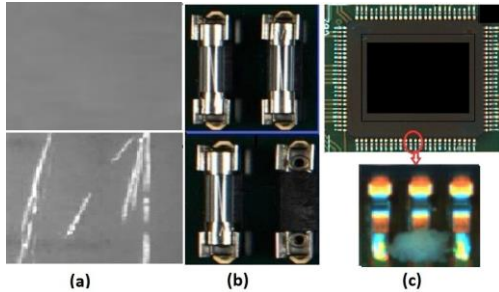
Defects examples: (a) scratches, (b) misplaced components, and (c) soldering defects.
